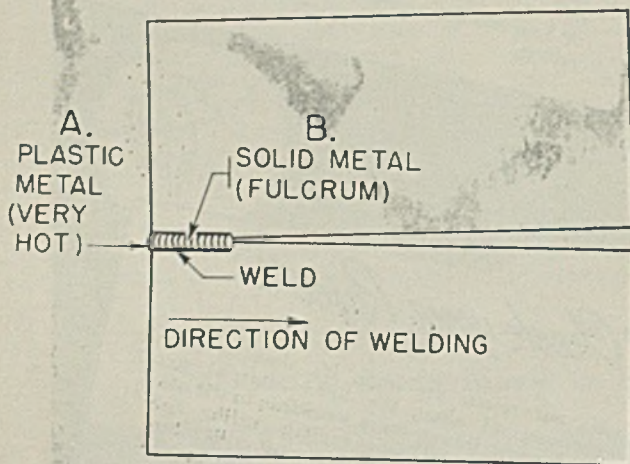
(Below) — Since point A has less metal surrounding it to carry off the heat of welding than does point B, it solidifies more slowly, even though it is welded first. While A is still molten, B has solidified and acts as a fulcrum about which the remainder of the plate draws together as the weld progresses. This, added to natural shrinkage of the cooling metal, tends to pull A apart
